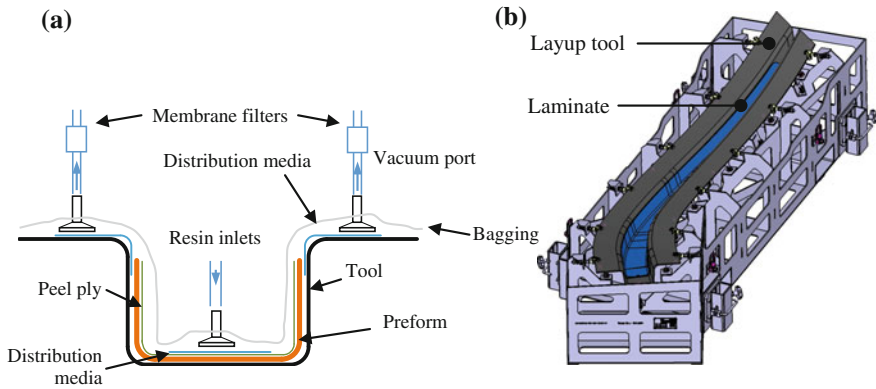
a MARI process [1]. b Winglet stringer grid manufacturing tool
